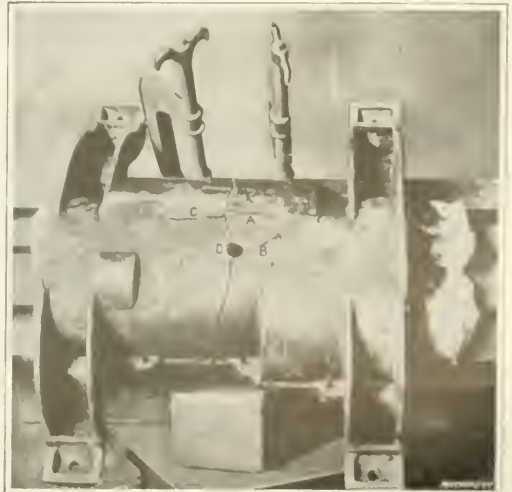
Method of saving Bearings and aligning Parts of Broken Case
